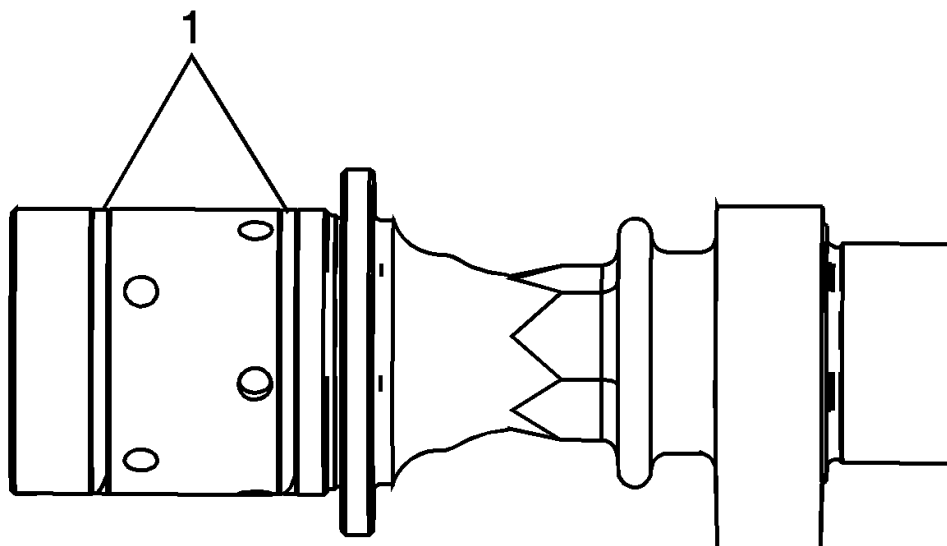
Locating Camshaft Sealing Rings In Camshaft Grooves
